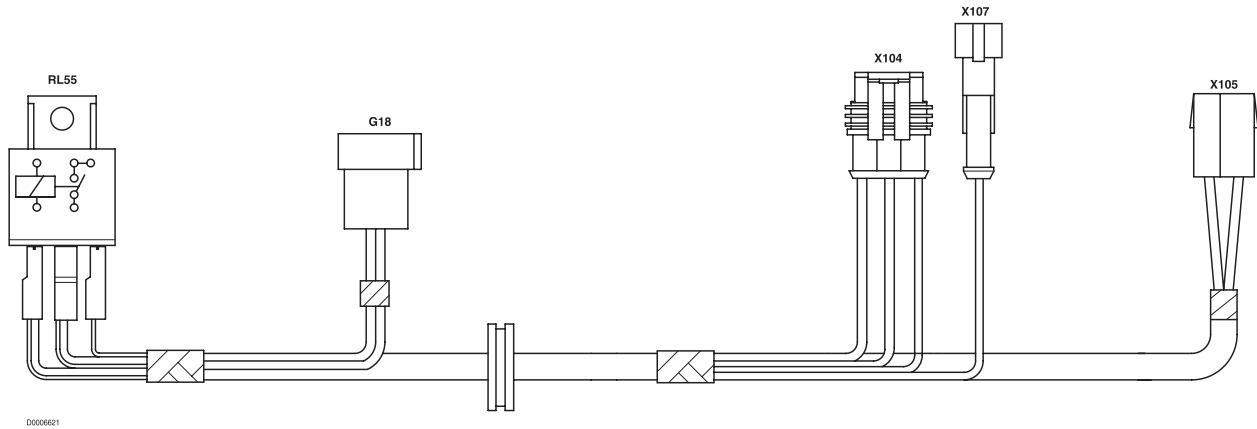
Air conditioning cooler fan wiring - Tractor with standard cab
